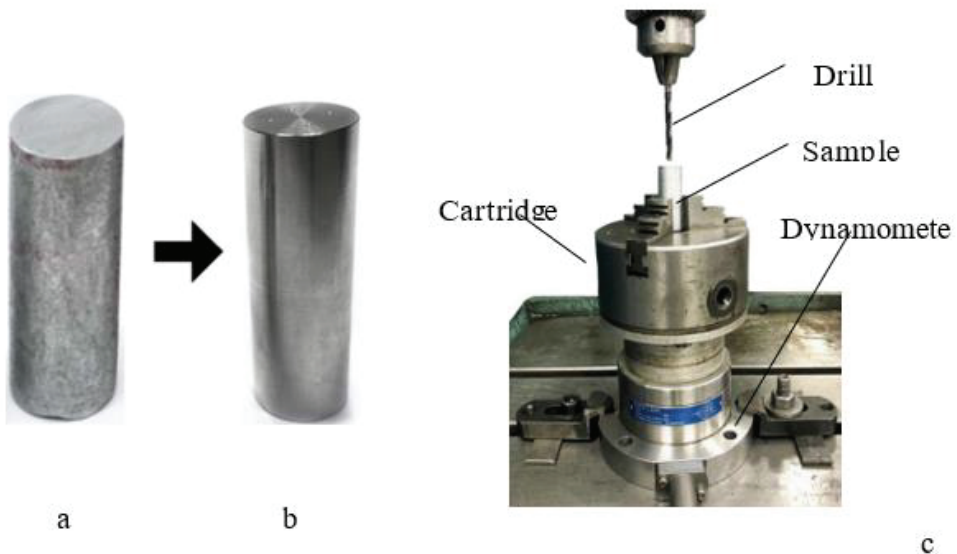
Cast Sample (a), Machined Sample (b) and Dynamometric Drilling Device (c).
